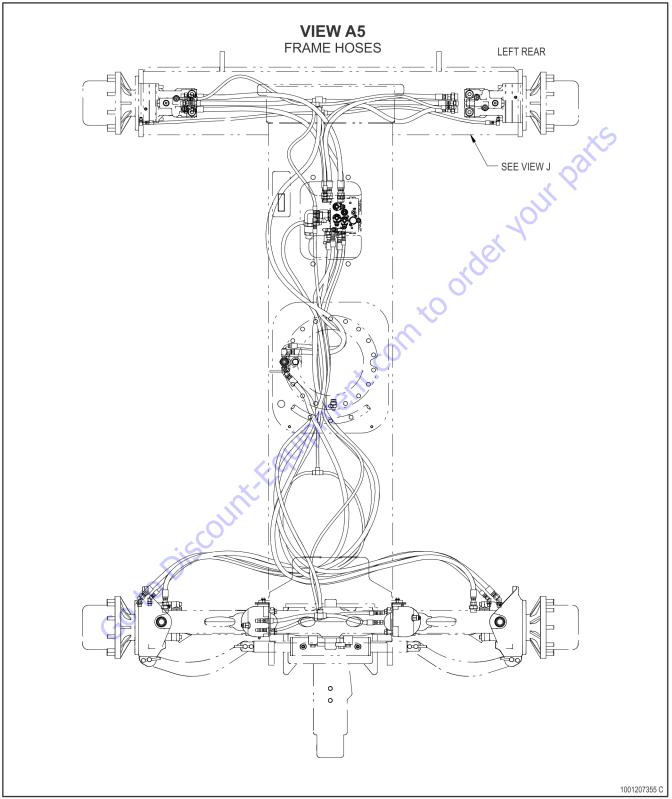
Hydraulics Installation - Sheet 12 of 28
